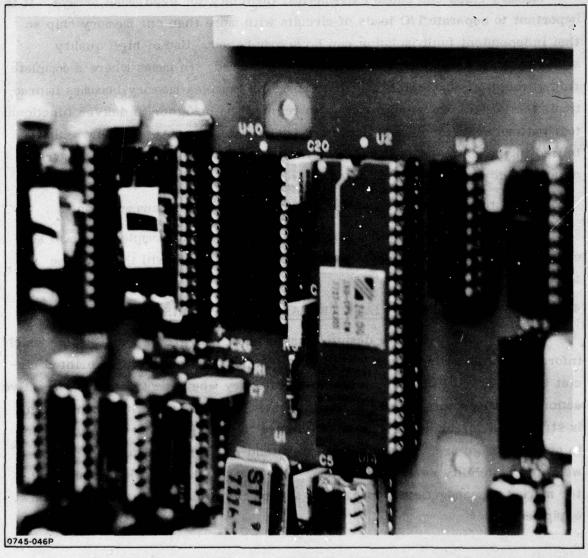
Testability of Microprocessor PCB Circuit Improved by Use of Socket
